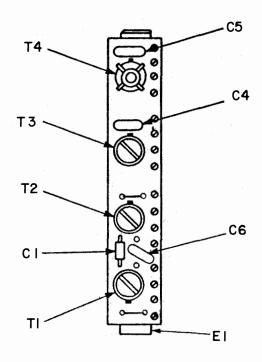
2 MHz Subassembly A2A4A20, Component Locations
